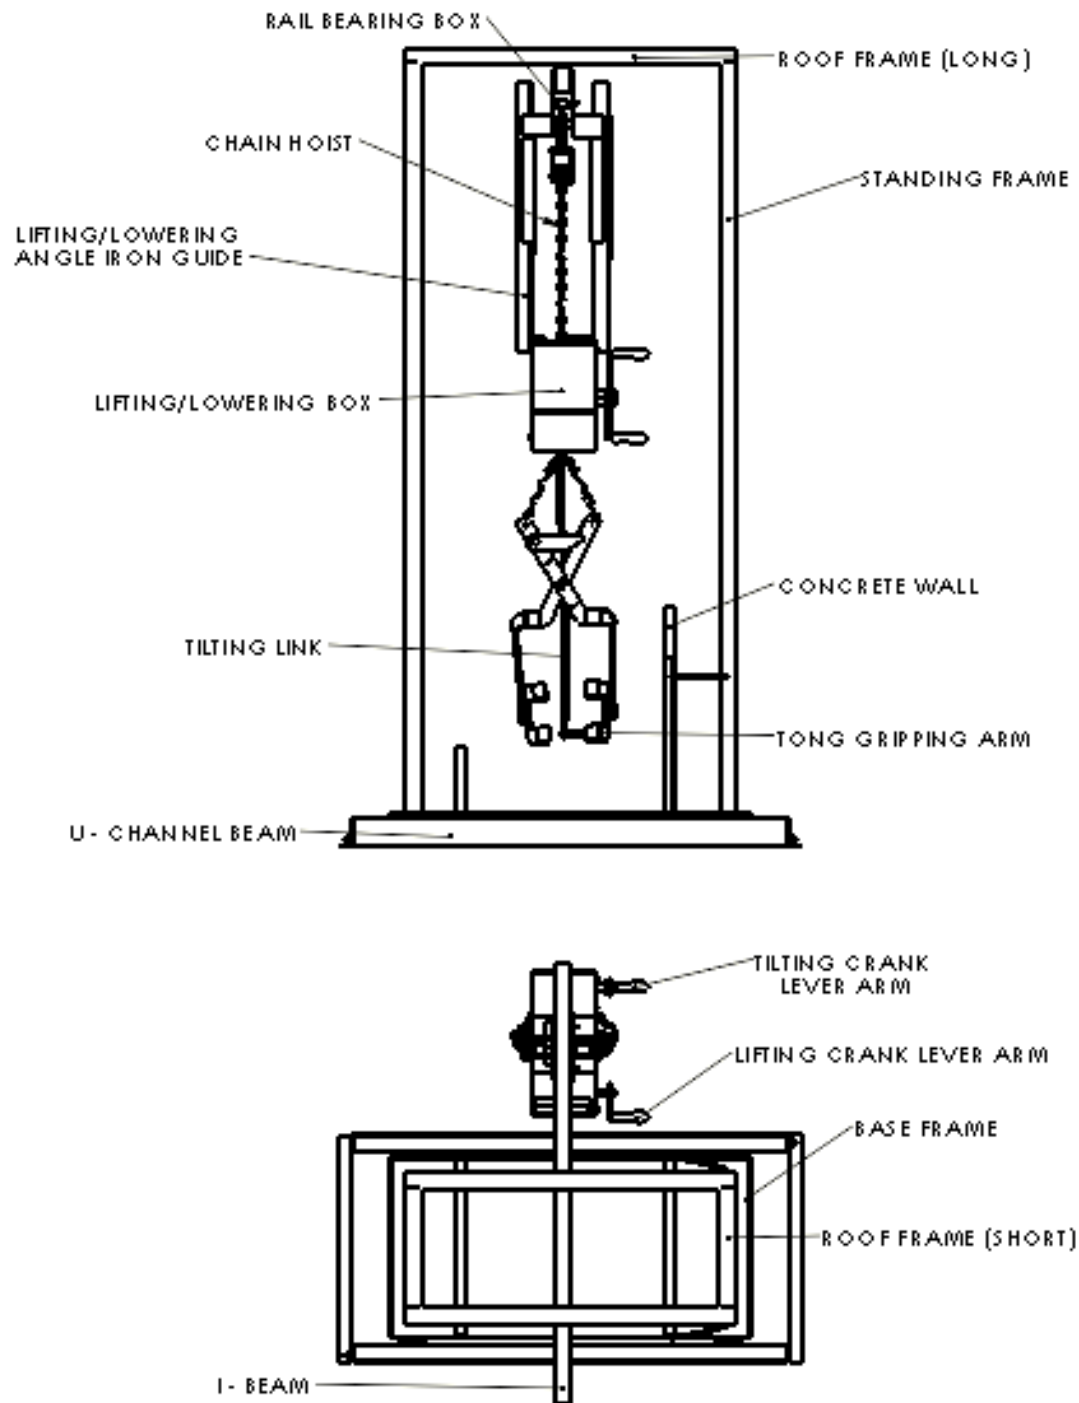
Sketch (Orthographic views) of the Casting Pouring Ladle Machine
